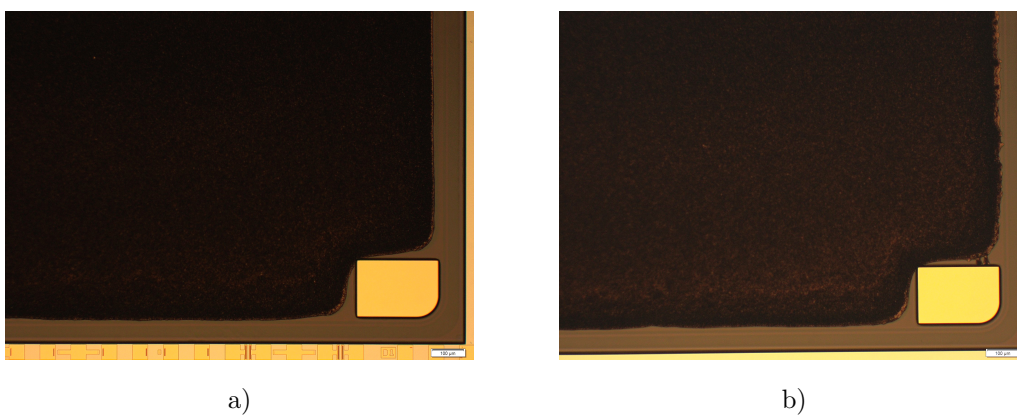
Direct printed copper pads on IGBT source pads with short-cuts due to the printing direction (a) and stencil back-side contamination (b).
